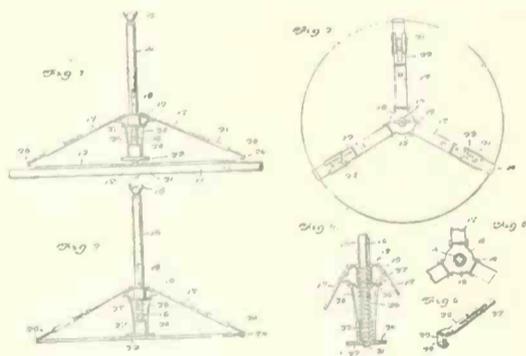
is a plan view with the parts in the position shown in Fig. 1; Fig. 4 is an enlarged central vertical sectional view of the device removed from the record; Fig. 5 is a horizontal section; Fig. 6 is a detail view of one end of one of the pivoted arms showing a modified form of grip.
